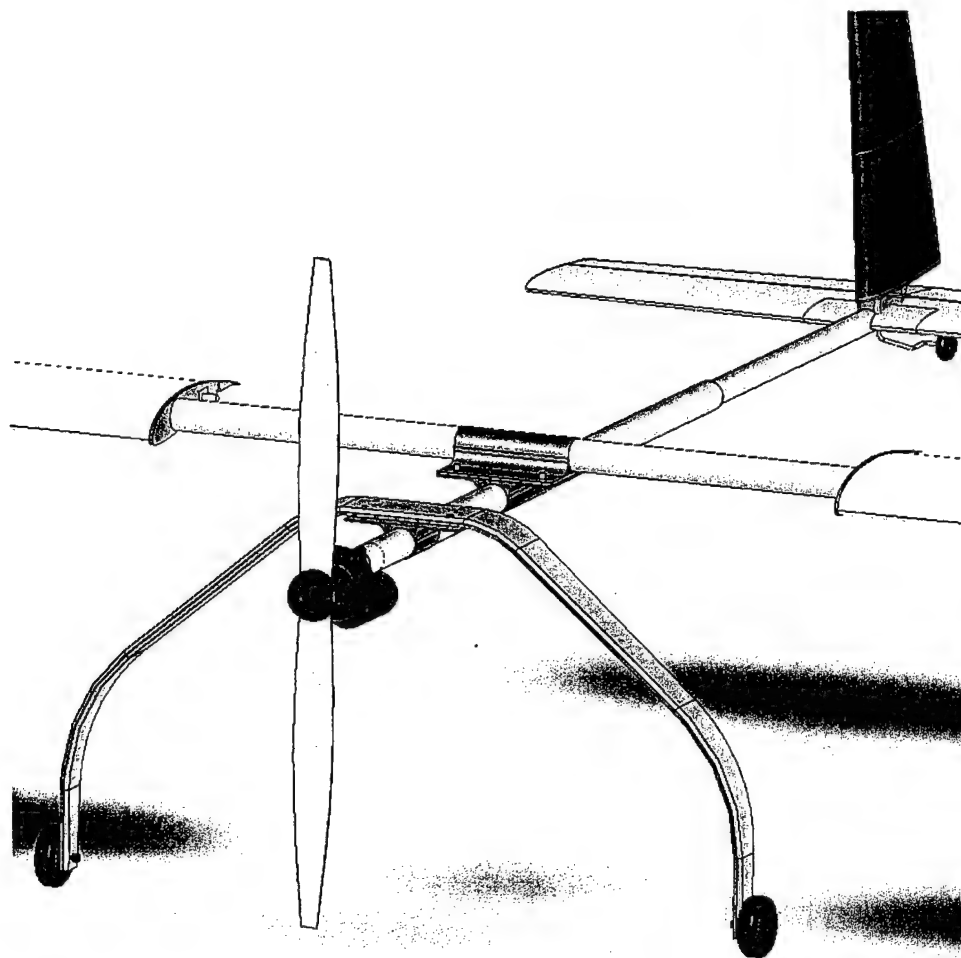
Joint connecting wing spar and landing gear to backbone
